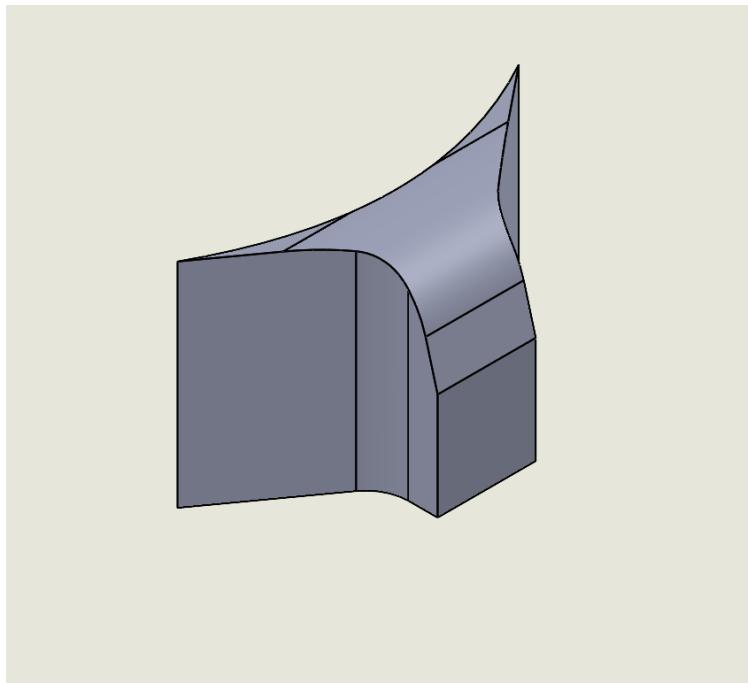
Camera shroud that is mounted on the switch band of the recovery bay coupler
